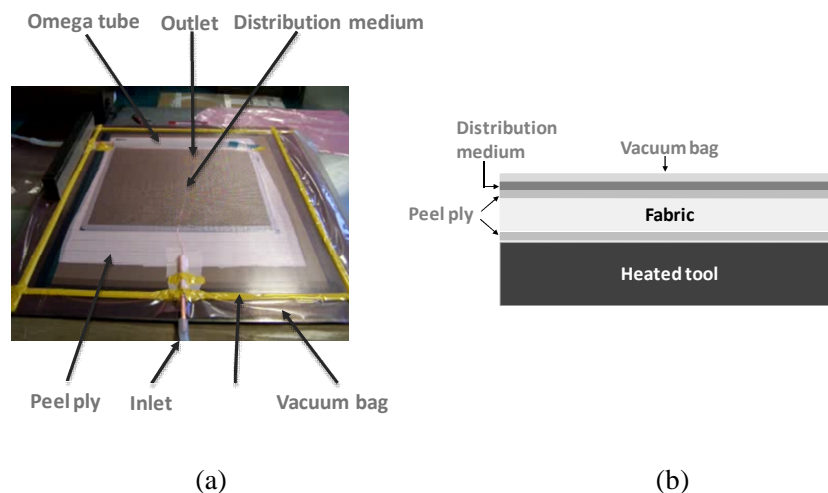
Infusion set up: (a) assembly before infusion; (b) schematic of the full assembly.
